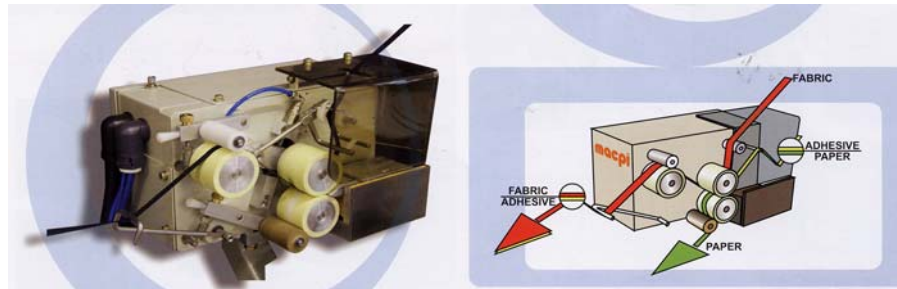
Adhesive tape and releasing tape on the edge bending machine.
